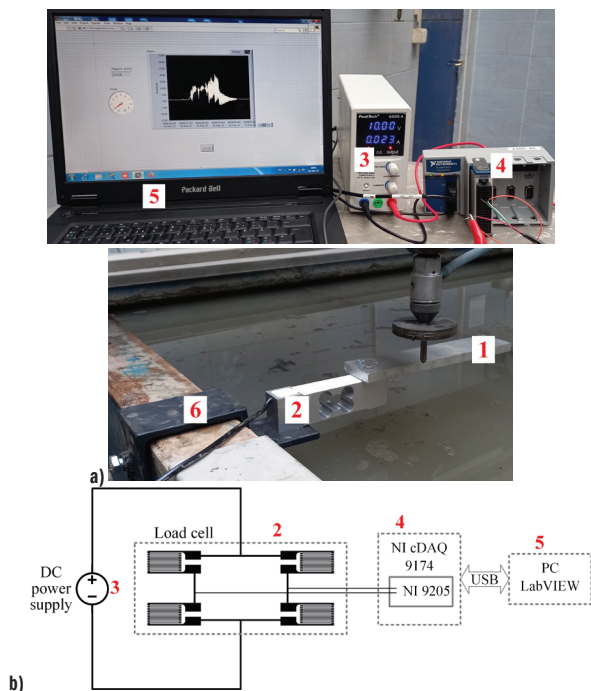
Experimental setup for cutting force measurement: a) photograph of the components, b) block scheme of connections
